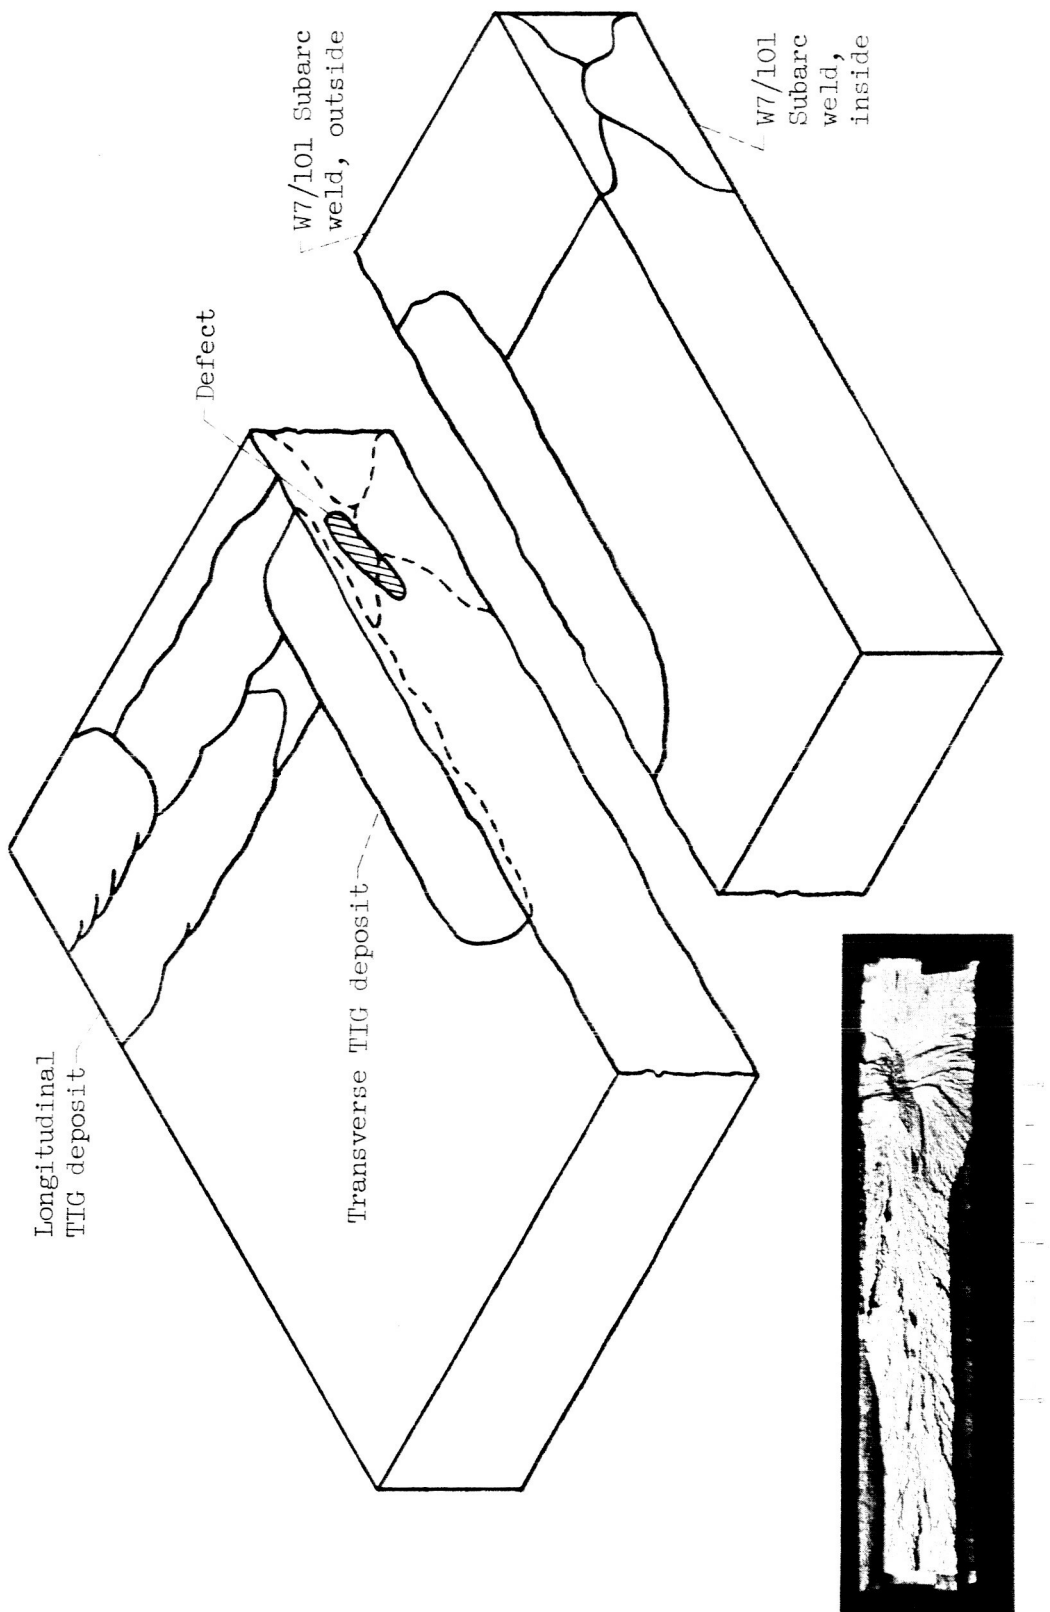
Isometric drawing and photograph of fracture surface of longitudinal tension specimen from W7/101 weld region showing defect related to weld deposits.
